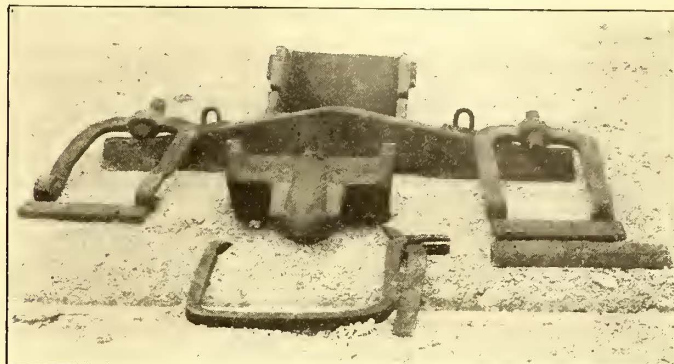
MOLDS AND CLAMPS, MILWAUKEE
